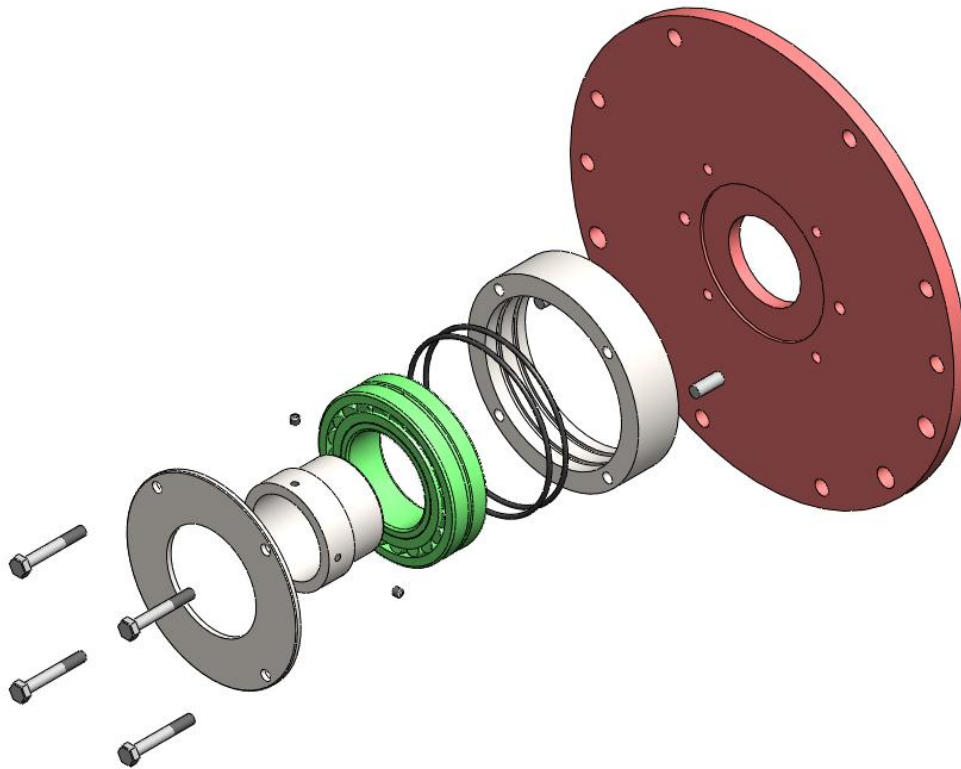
Exploded View of the Spherical Roller Tailpipe Bearing Assembly
